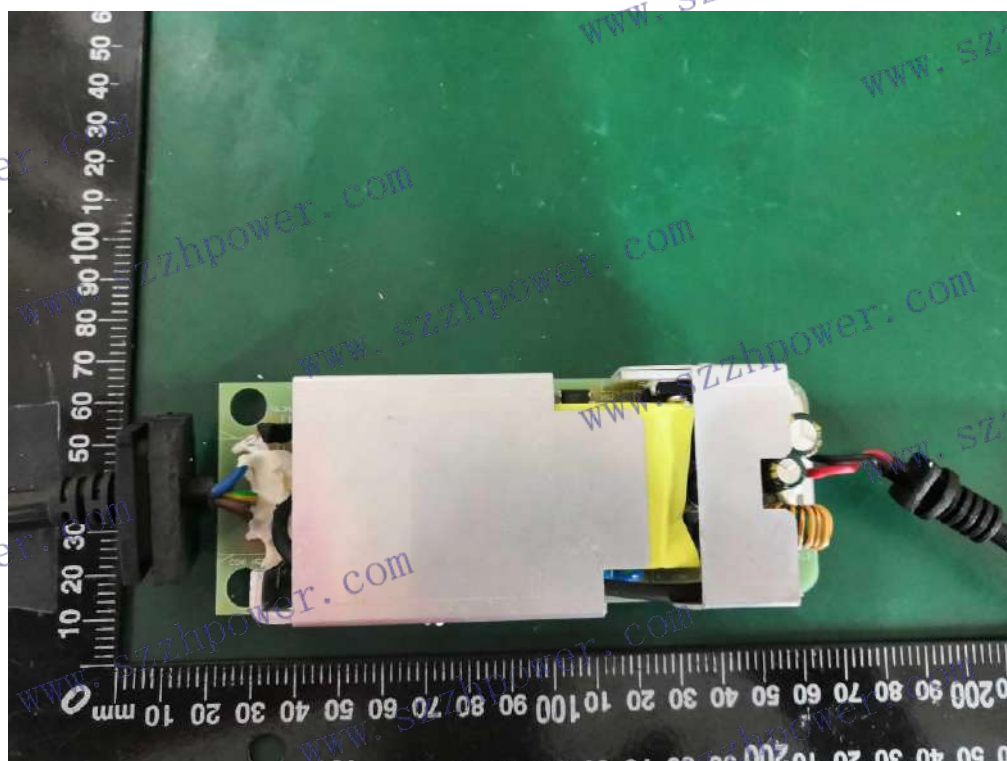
Top view of PCB for models ZH100DU-xxxxyyyWz, KS100DU-xxxxyyyWz
